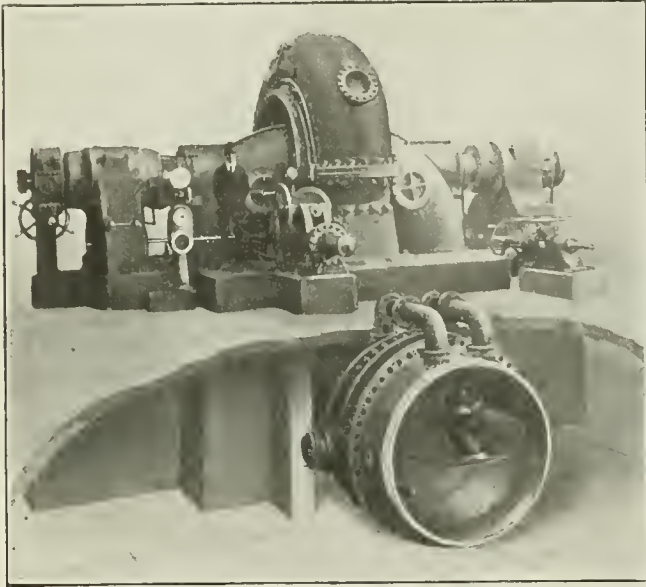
COMPLETE TURBINE AND BUTTERFLY VALVE
